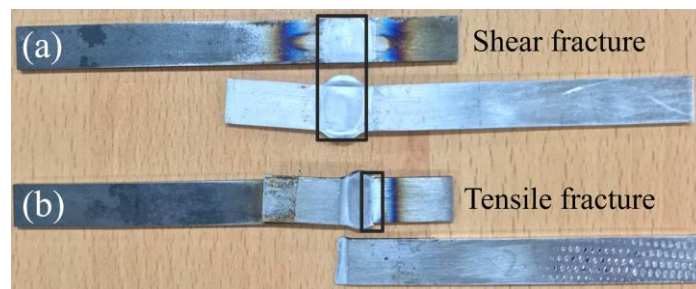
Failure mode of the joints during quasi-static lap shear tensile test: (a) shear fracture, (b) tensile fracture.
